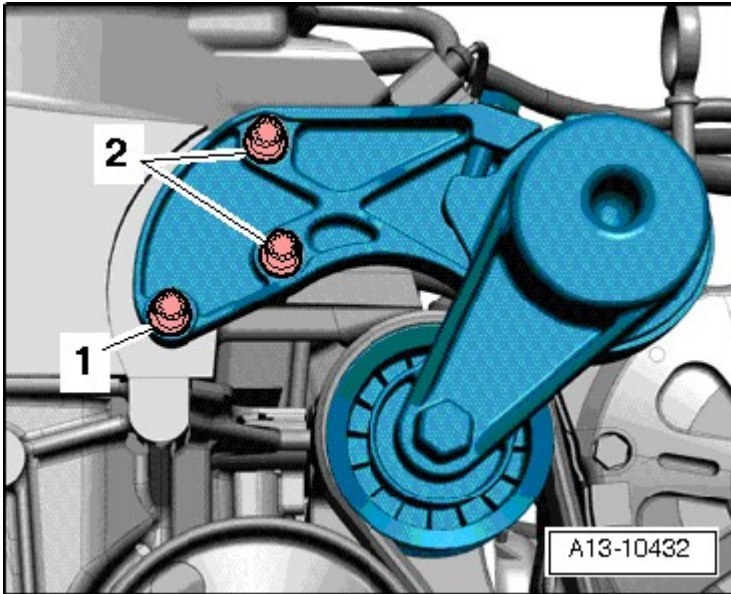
Identifying Bolts -1 And 2- To Ribbed Belt Tensioner
